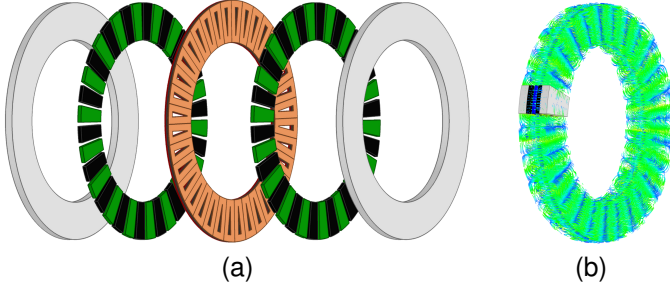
The exploded view of the double-rotor single PCB stator coreless AFPM machine configuration (a). Full model flux density lines of the example coreless AFPM machine (b). The design optimization and other studies were done based on 3D FEA models, but employing an ultra-fast model that takes advantages of the machine symmetry and minimum number of FEA solutions.
